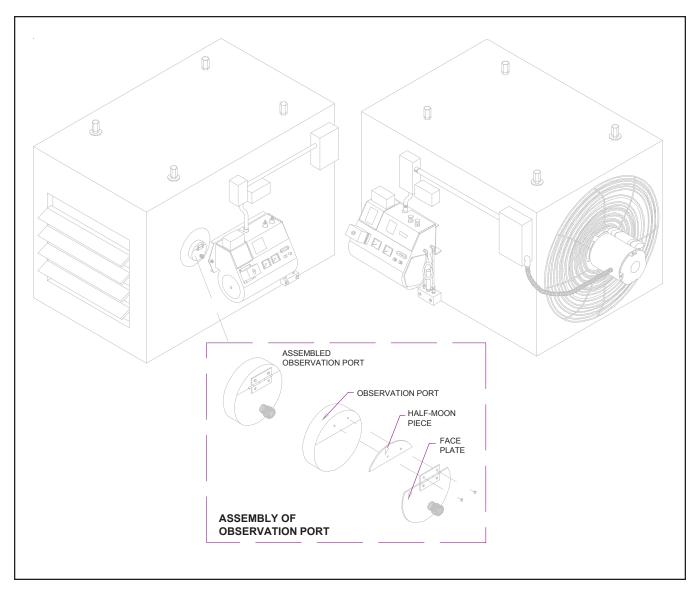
B - Three-dimensional View - Unit Heater Completely Assembled
